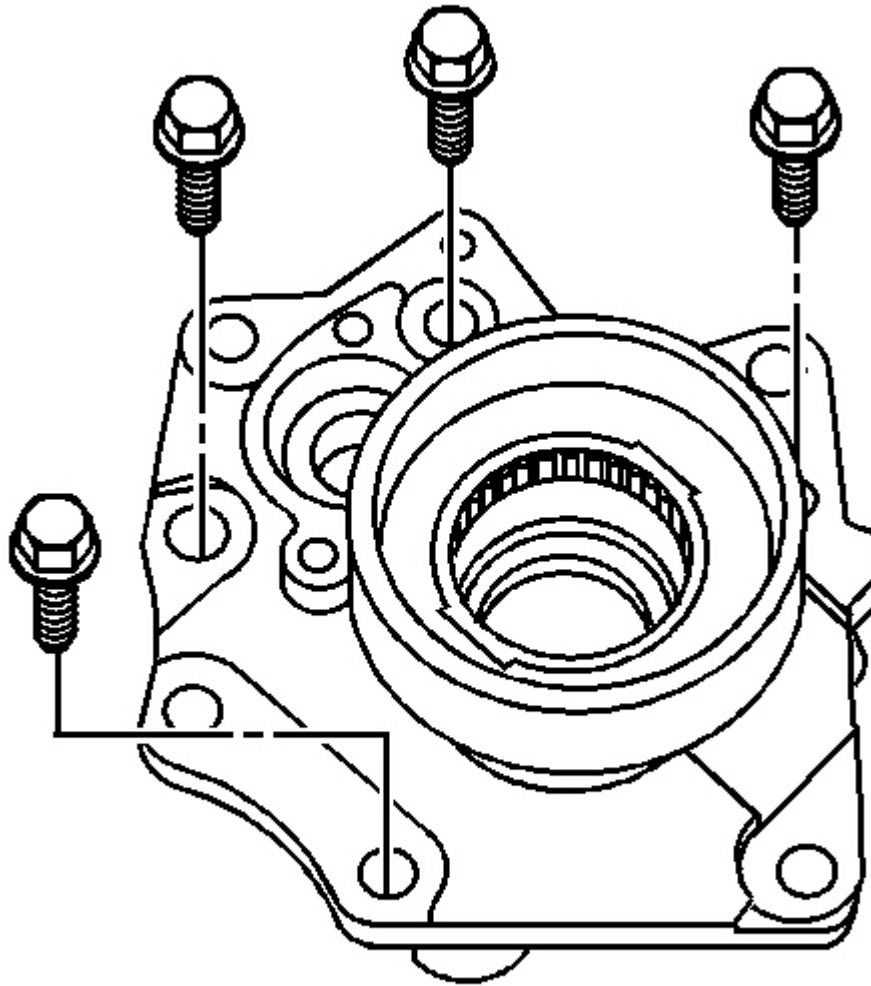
View Of Intermediate Shaft Bearing Case Bolts
